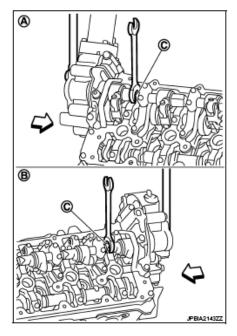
Removing Mounting Bolts Of Control Shaft Courtesy of NISSAN MOTOR CO., U.S.A.
